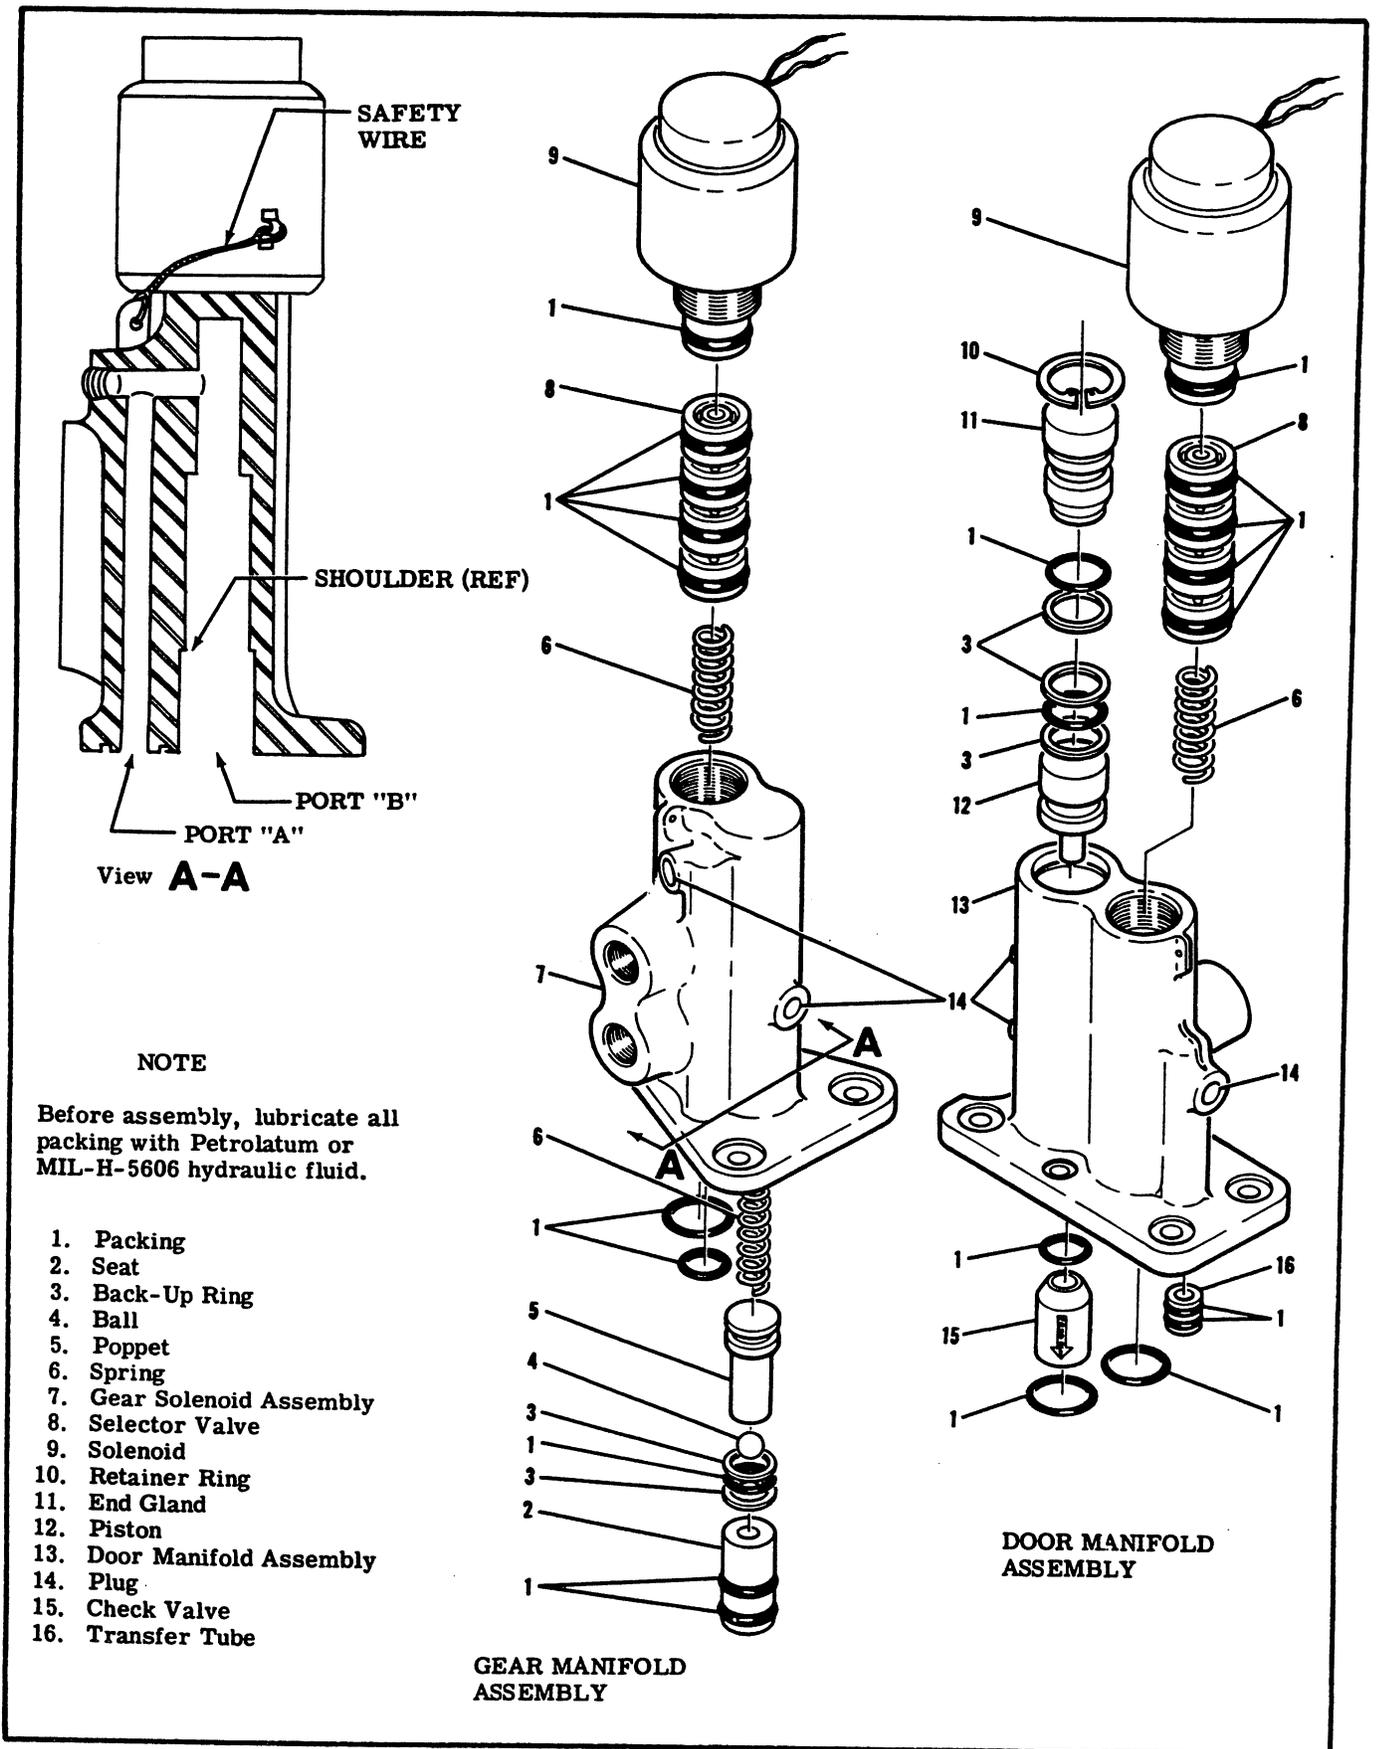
Hydraulic Power Pack Manifold Assemblies
